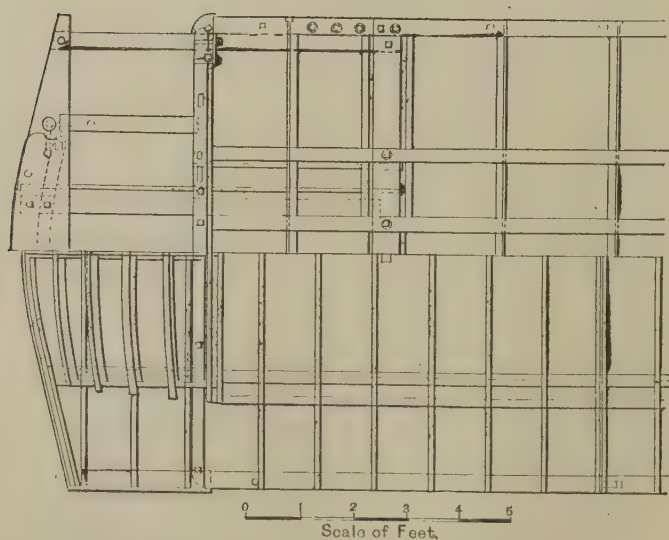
FRAMING OF FLOOR AND ROOF.
